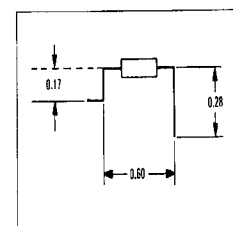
Mixer Diode Forming Dimensions in Inches
